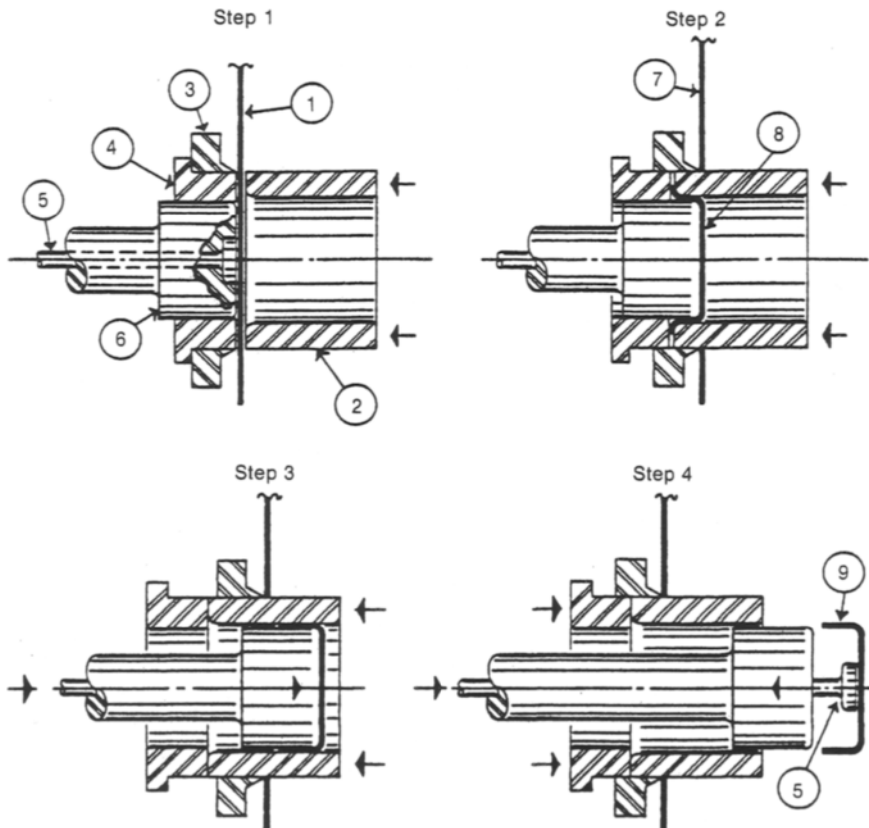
General arrangement of tooling and steps of the cupping operation: 1 aluminium sheet, 2 punch die, 3 knife edge, 4 blankholder, 5 stripper, 6 die centre, 7 skeleton scrap, 8 partially formed cup, 9 deep drawn cup. (Reproduced courtesy of Texaco Inc.)
